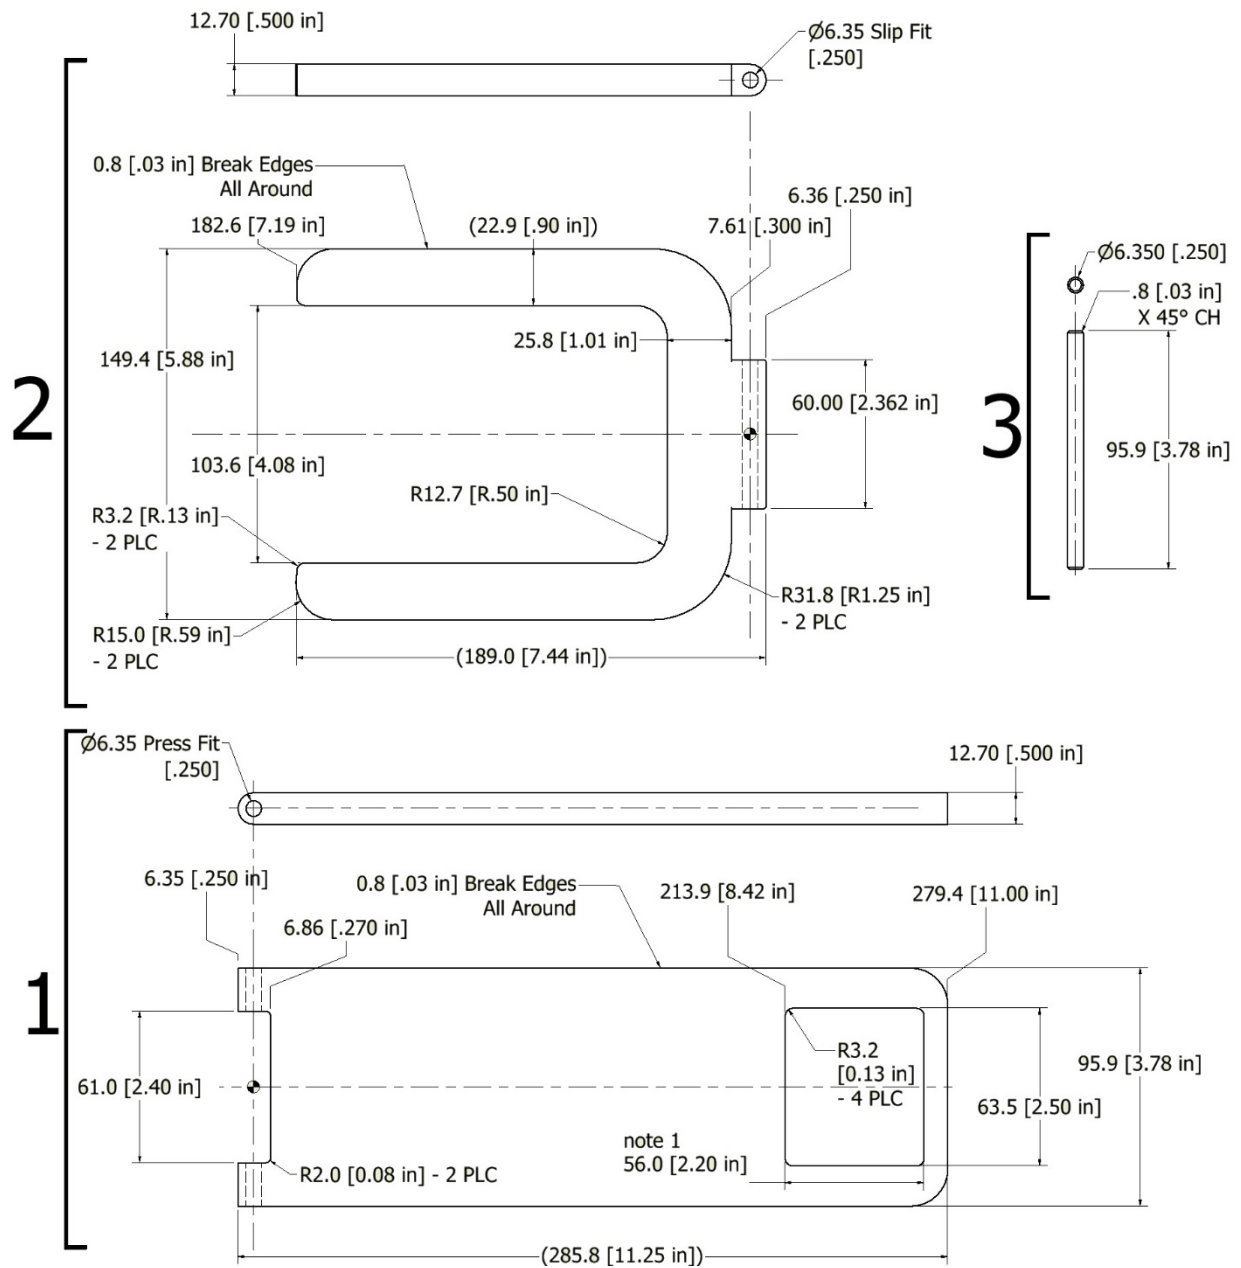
Hinged Weight Gauge–Newborn Part Drawings
